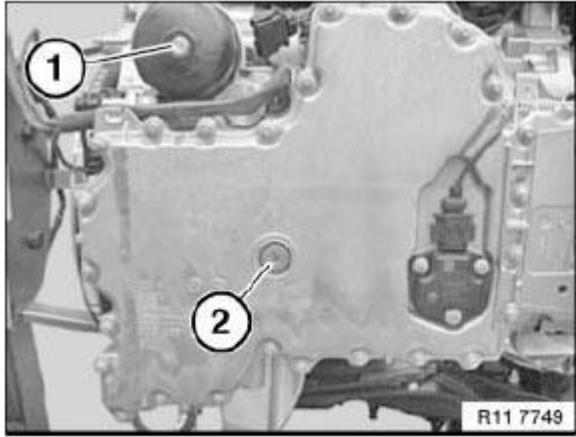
Identifying Oil Sump And Filter Cap Plug
